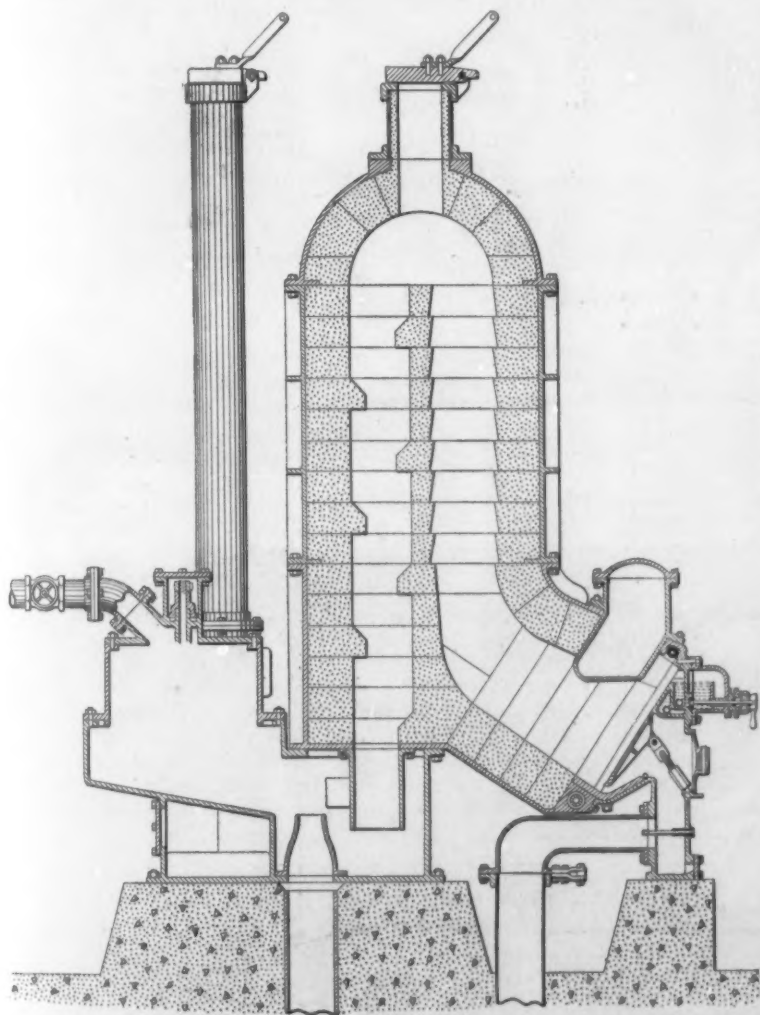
Sectional Elevation of a 300-H.P. Producer.
